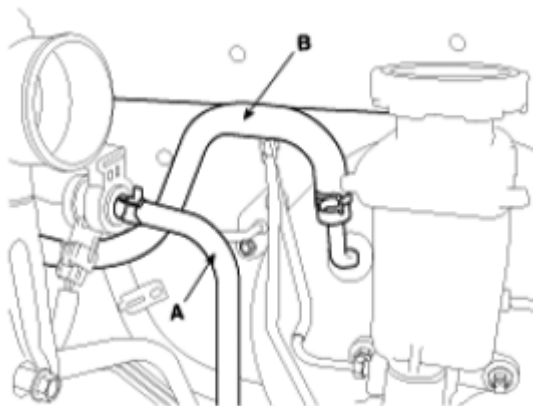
Identifying PCSV (Purge Control Solenoid Valve) Hose And Brake Booster Hose
